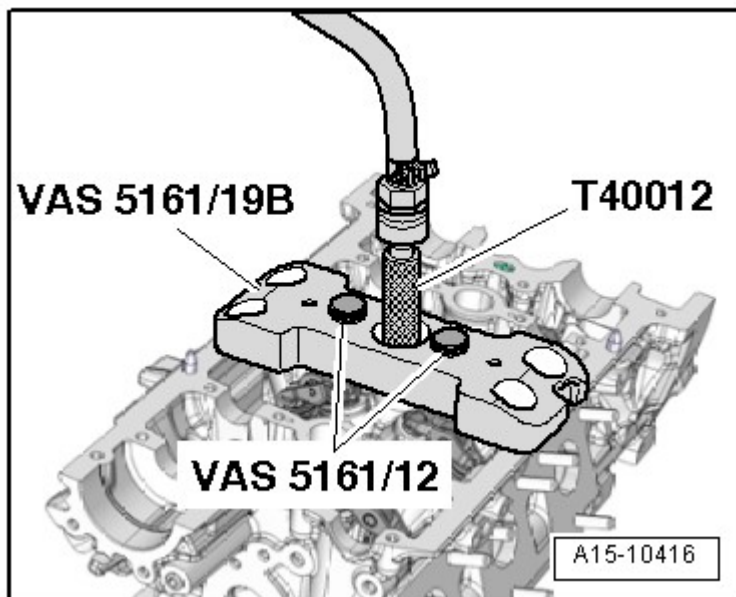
Identifying Guide Plate For FSI Engine VAS 5161/19B
